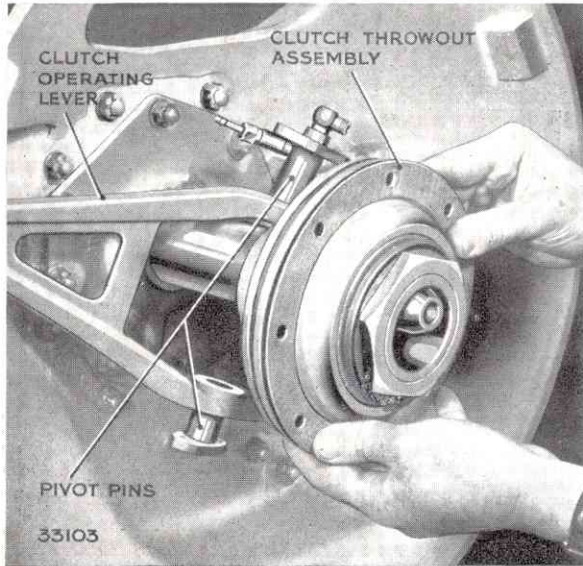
REMOVING THE WITHDRAWAL ASSEMBLY
